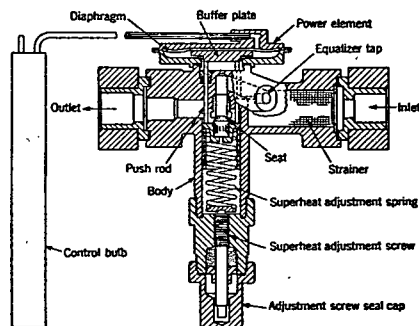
TYPICAL THERMOSTATIC EXPANSION VALVE
